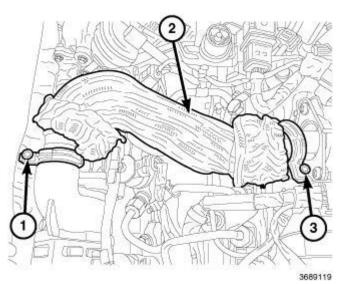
EGR Tube & Clamps Courtesy of CHRYSLER GROUP, LLC
